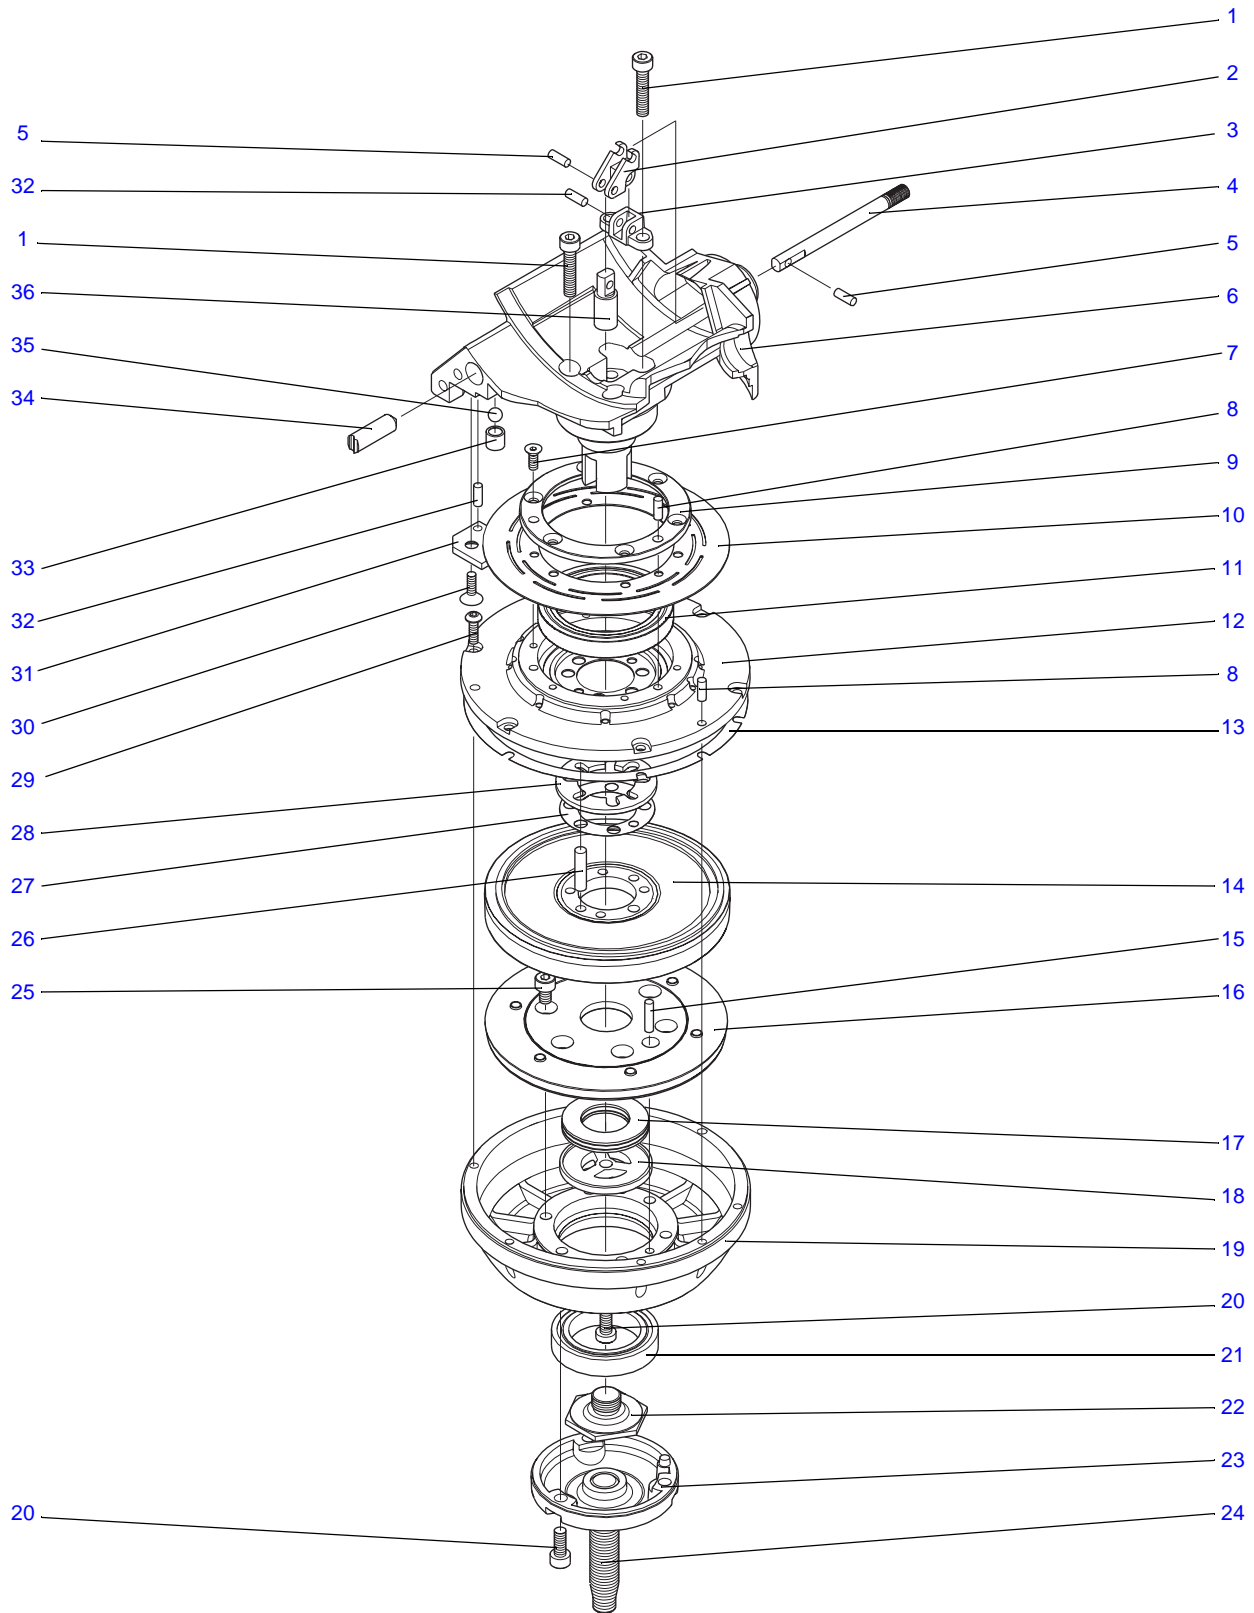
Vision SD12 Pan and Tilt Head - Final Assembly
